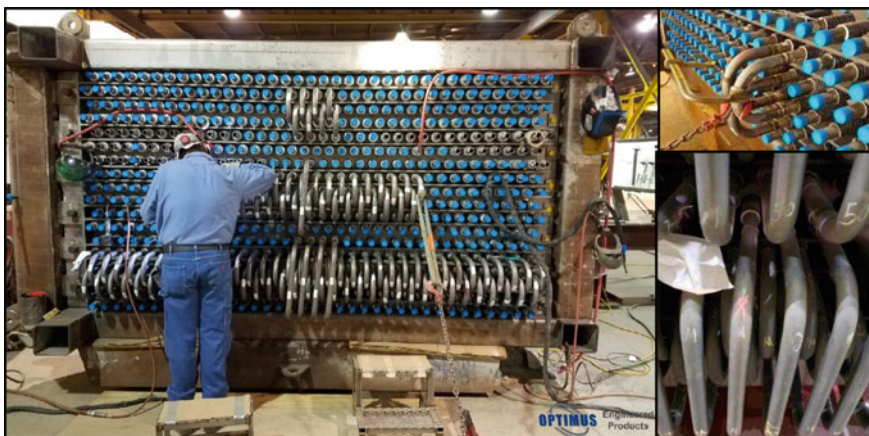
Example of challenging welder access and highly restrained closure welds which superimpose additional stresses to the welding residual stresses during the welding process [10]
